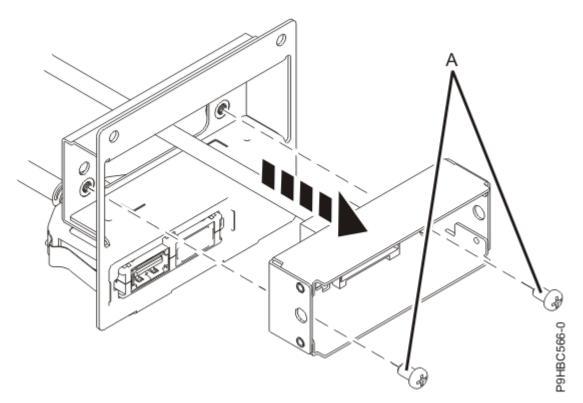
Removing the control panel display cable from the housing for a rack-mounted system
